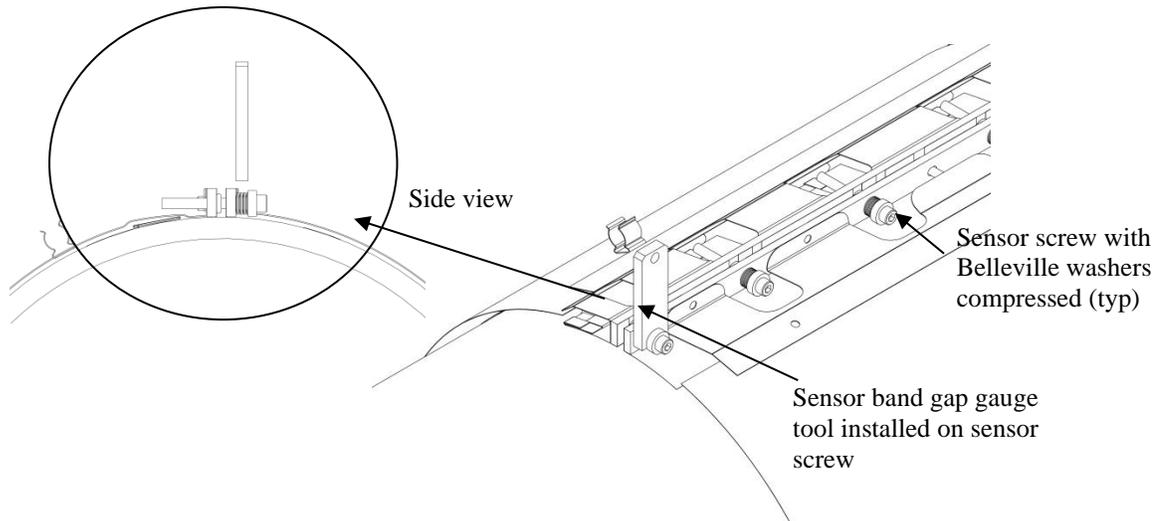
Sensor Band Gap Gauge Tool Installed on Sensor Screw
